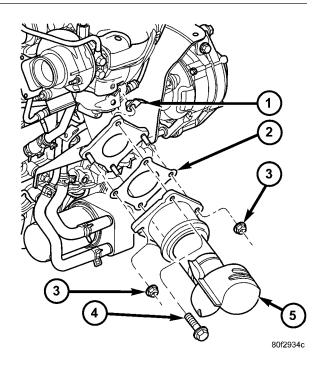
Converter to Exhaust Manifold Connection - 2.4L Turbo
